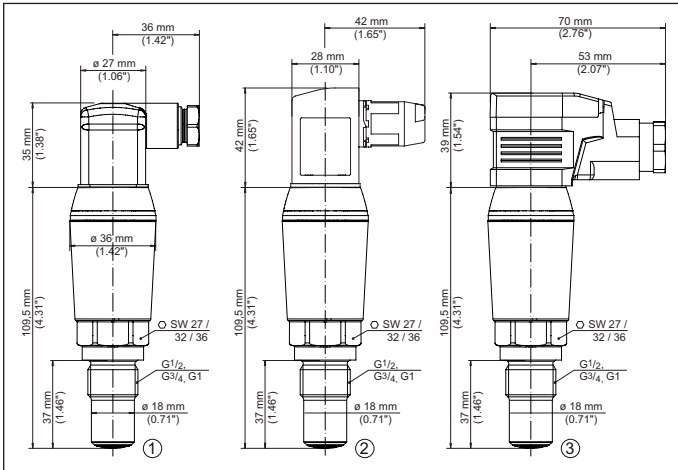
VEGAPOINT 24, standard version - thread with valve plugs acc. to ISO 4400
